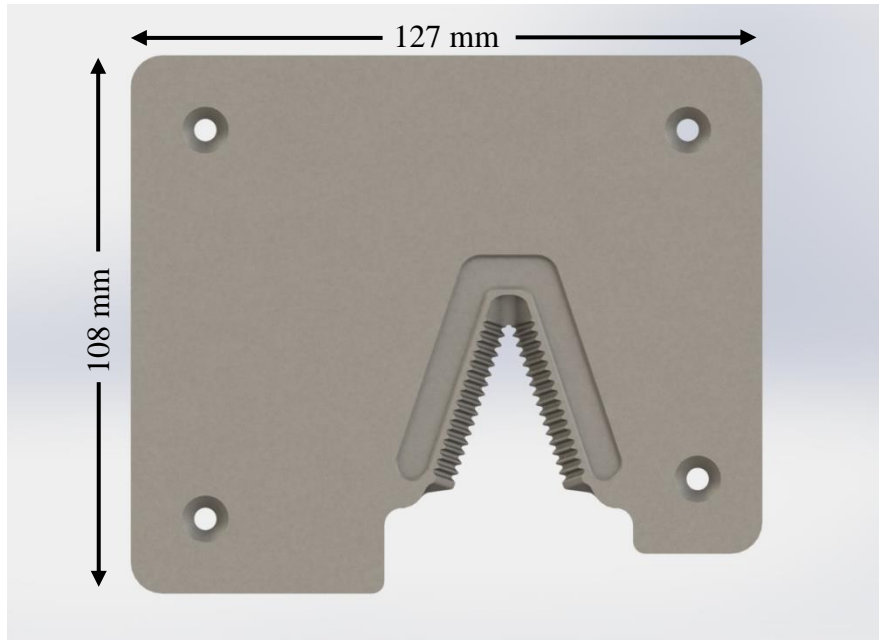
Half-feed combine harvester small bottom blade forging punch plate
